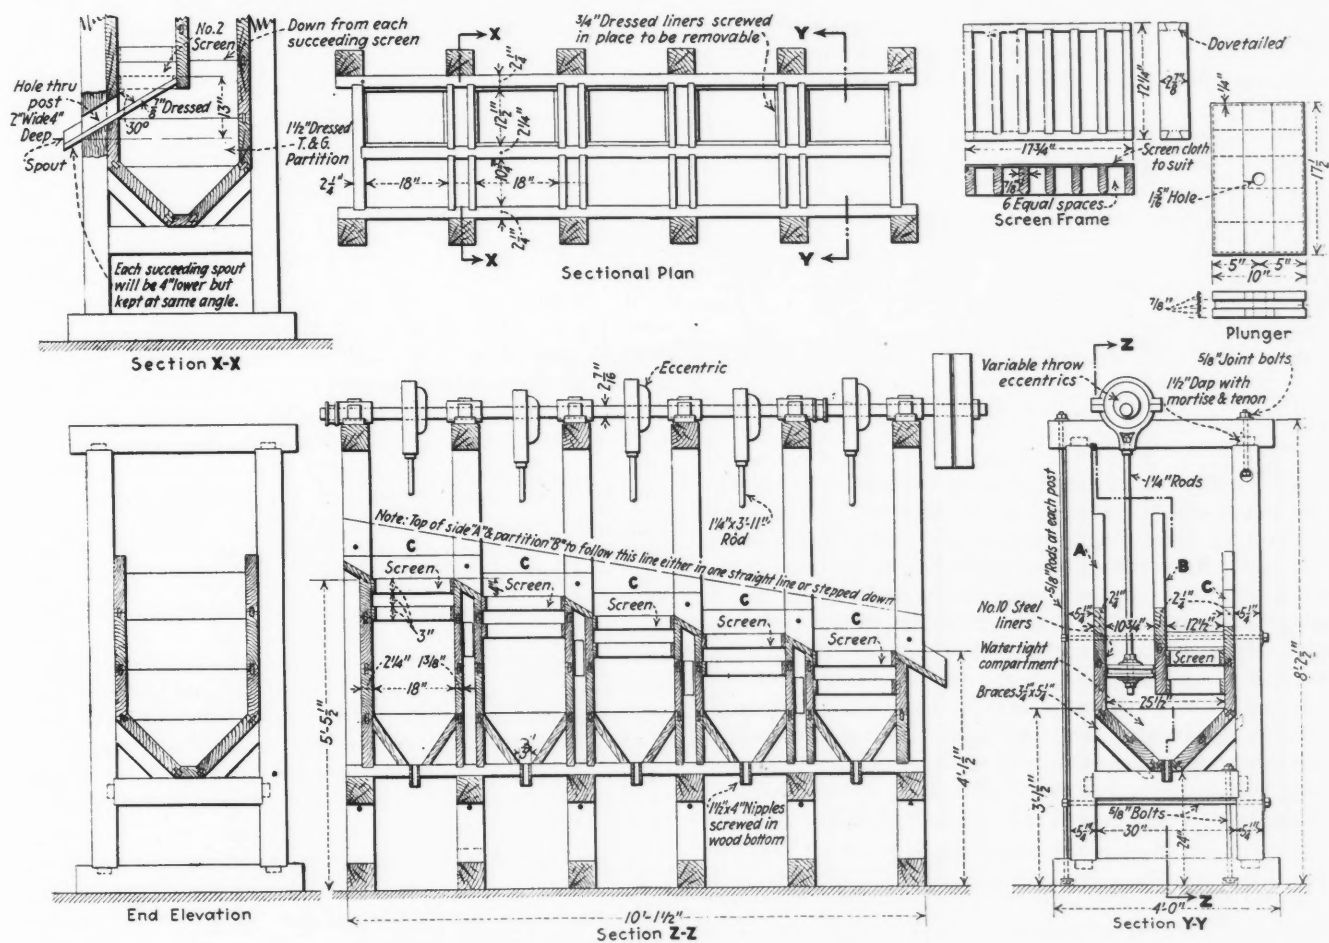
DETAILS OF EXPERIMENTAL JIG
